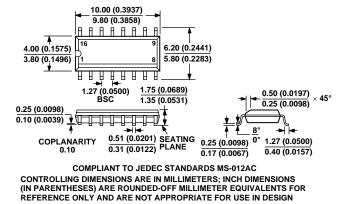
16-Lead Standard Small Outline Package [SOIC] Narrow Body [R-16] Dimensions shown in millimeters and (inches)
